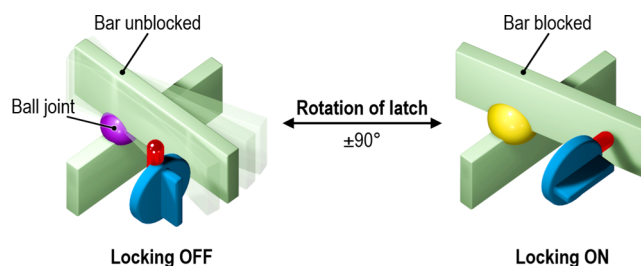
Schematic illustration of an open (left) and folded (right) scissor-like mechanism locked/unlocked by a rotary latch.
